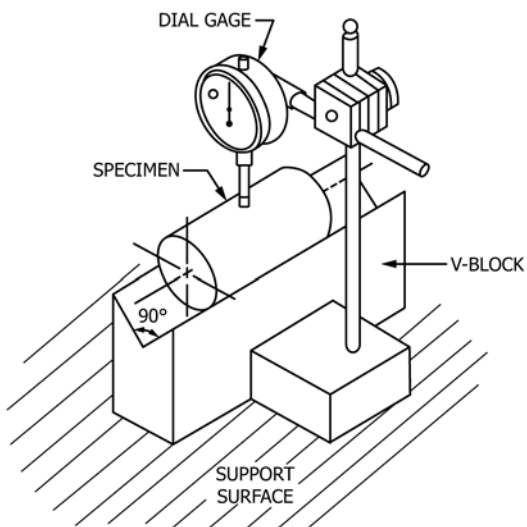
Assembly for Determining the Straightness of Elements on the Cylindrical Surface (S2)
